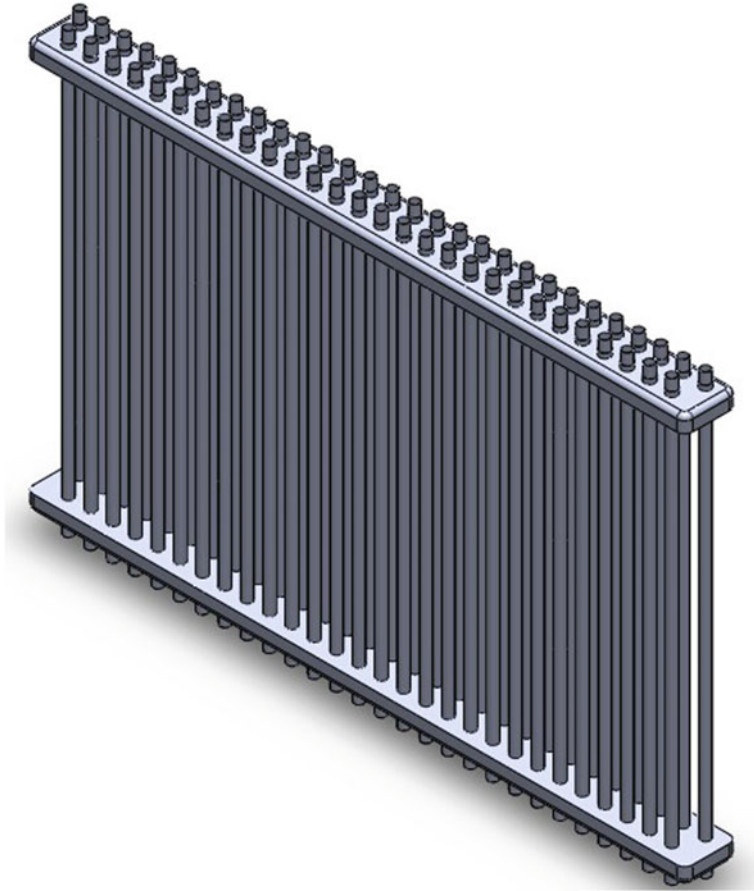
CAD model of the radiator tubes done using SolidWorks
